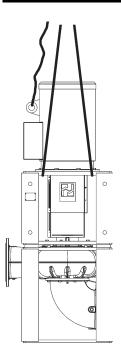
Fastening the lifting gear to the pump unit in a vertical position
